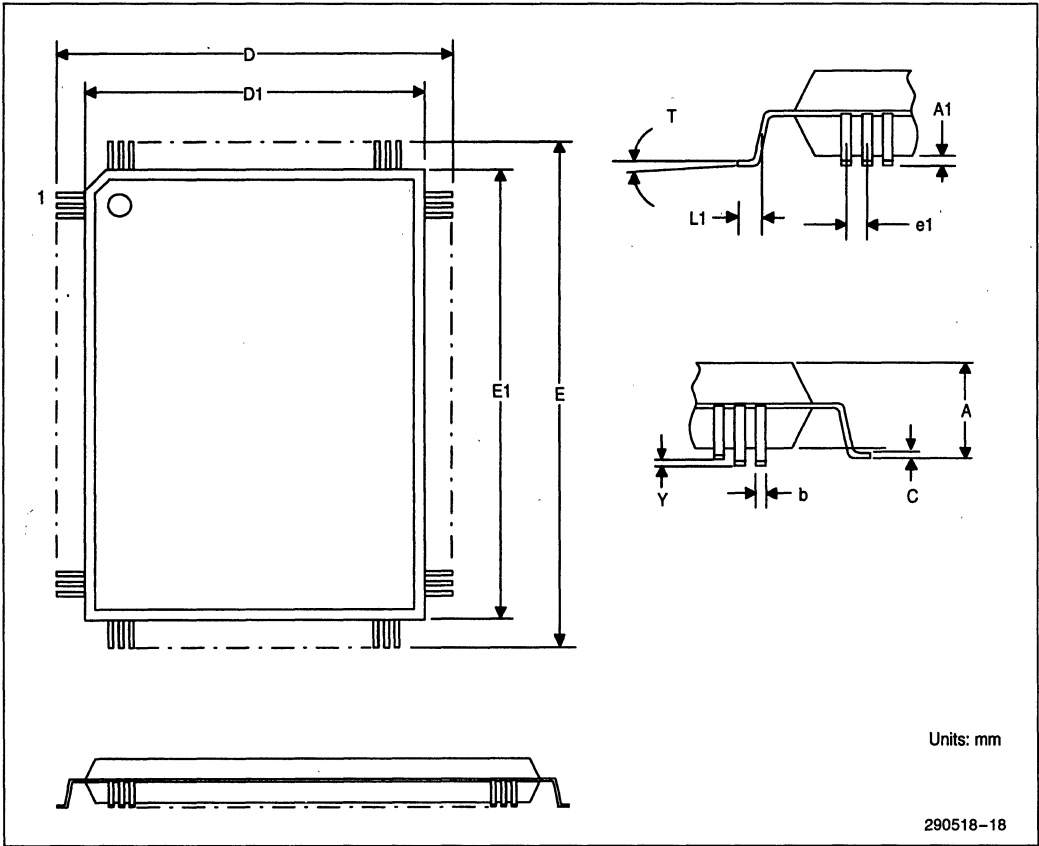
100 Pin Plastic Quad Flat Pack (PQFP) Dimensions
